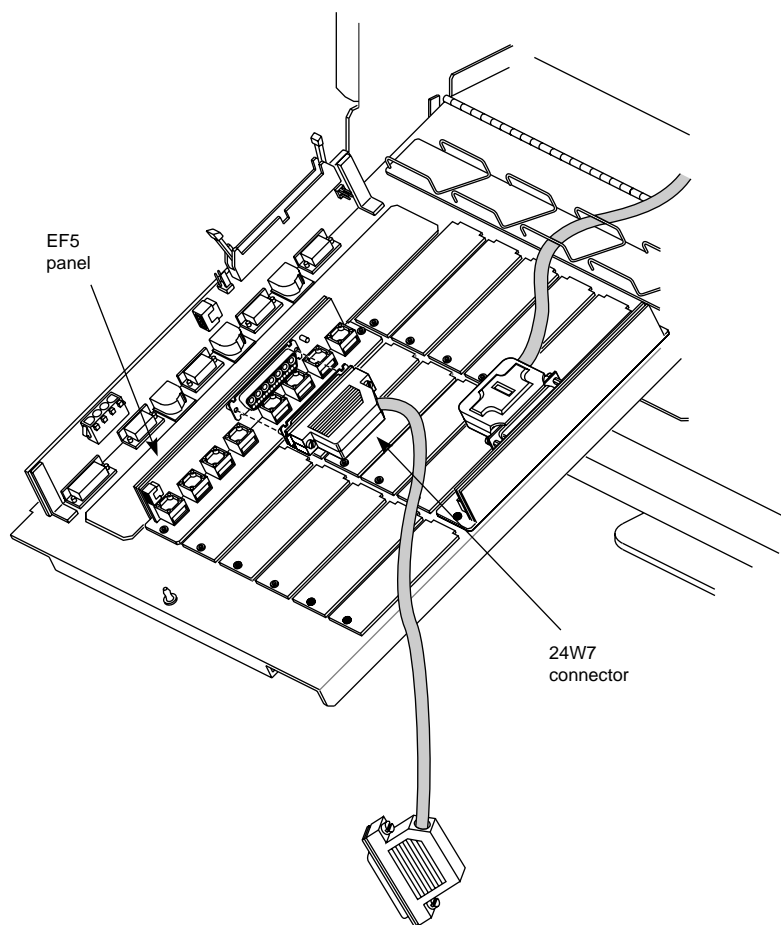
Attaching the 24W7 Cable to the EF5 0 and 5 Panel
